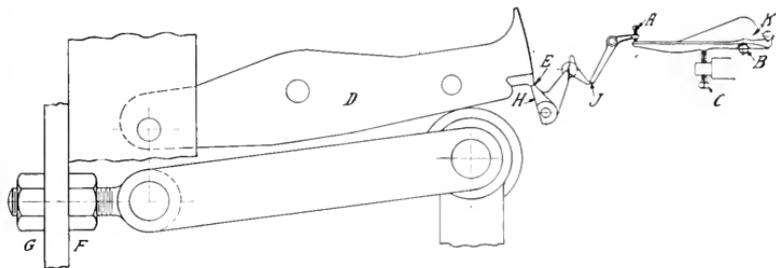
Sketch showing Tripping Mechanism of High-speed Circuit Breaker
